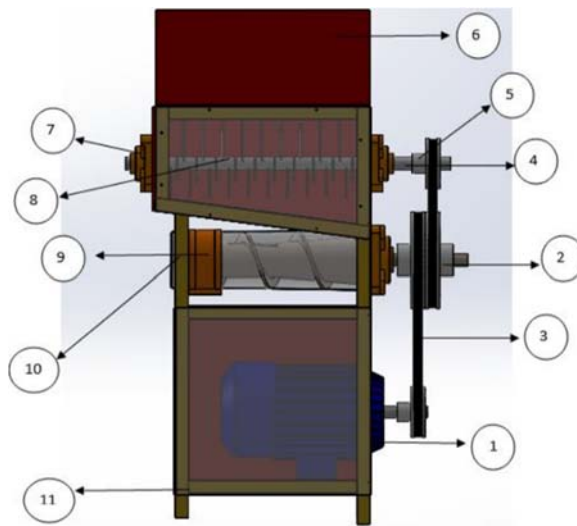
Final layout of the Styrofoam Waste Processing Machine
